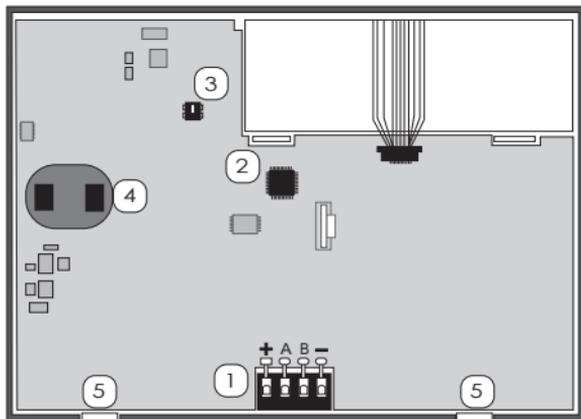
PARTS DESCRIPTION AND PCBA TERMINALS
